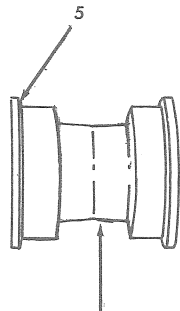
WEAR PATTERN -- IDLER OFF-CENTER TOWARD INSIDE
